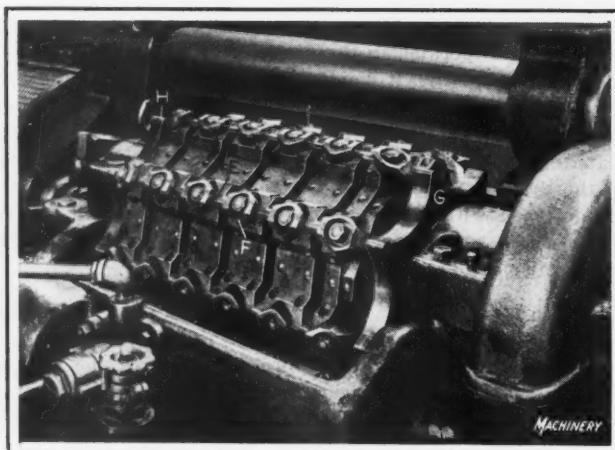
Continuous Drum Milling Fixture equipped with Cams which control the Contour of the Surfaces milled
